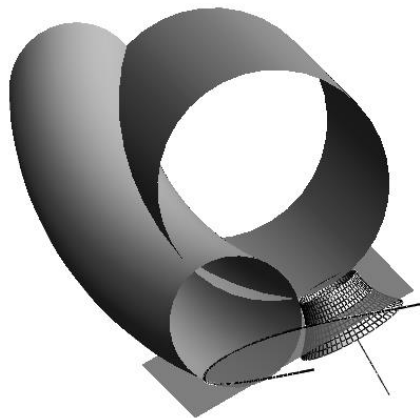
A profile cutter for processing the surface of a gear tooth in a transmission gear with an EC-gearing. The section plane perpendicular to the axis of the cutter and the line of the gear tooth section by this plane are shown.
